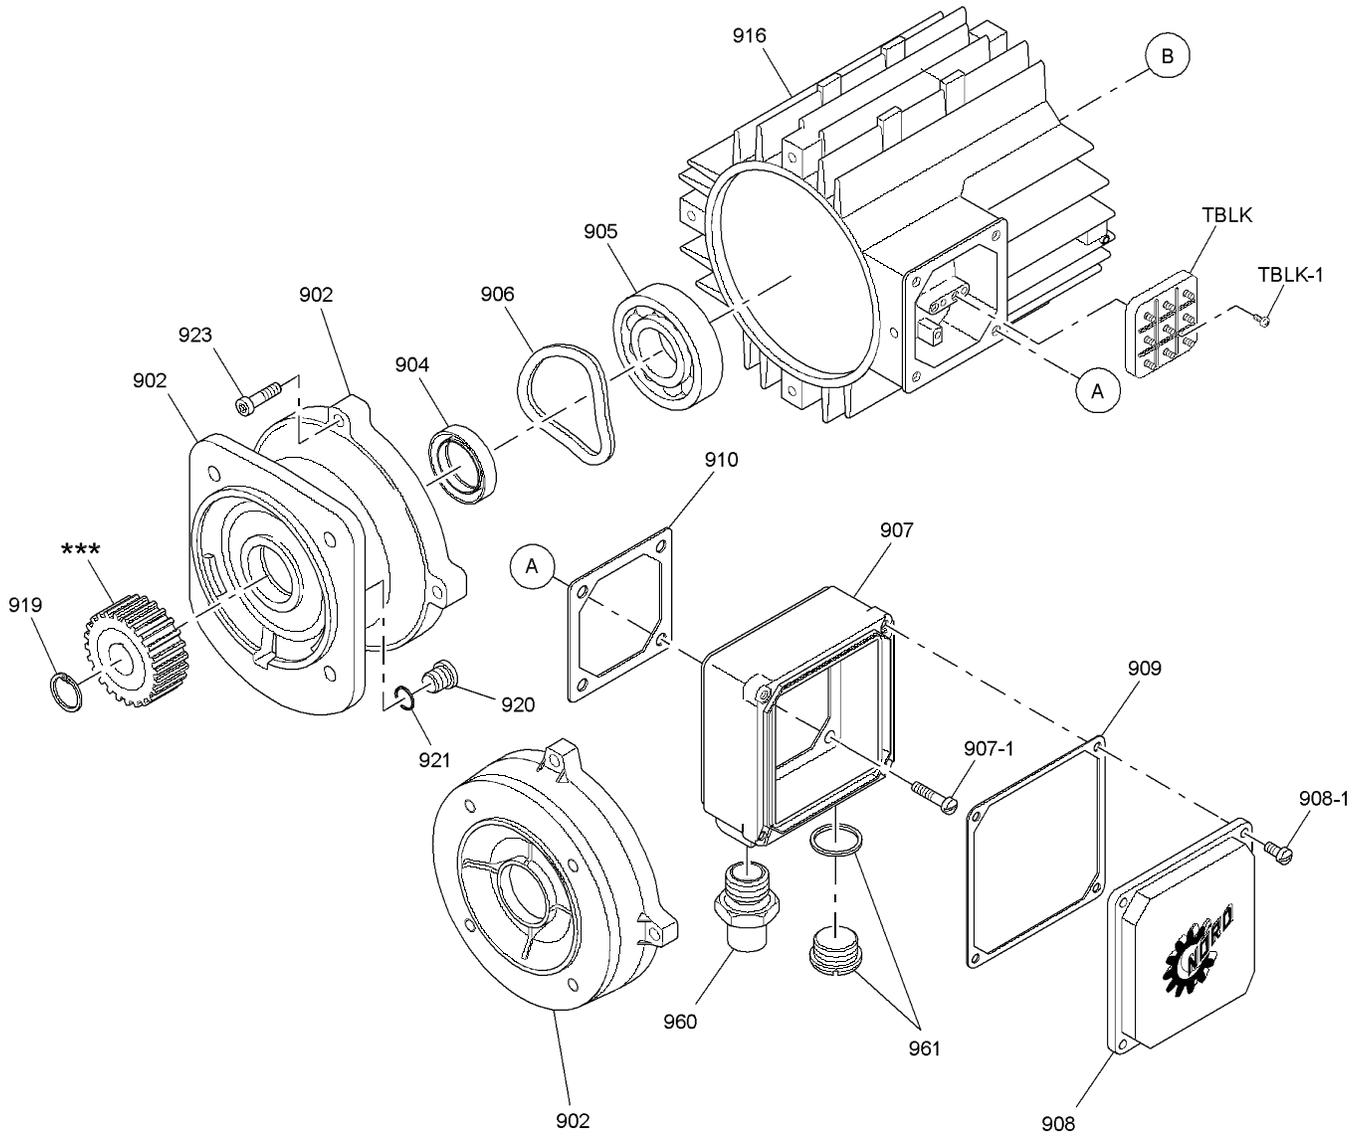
General Motor Exploded View and Generic Parts List (Sheet 1 of 2)
